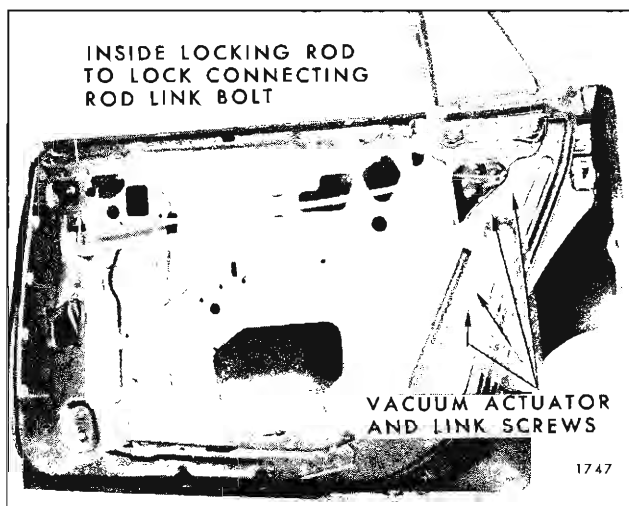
D81—Vacuum Lock Actuator, and Link Assembly Removal
